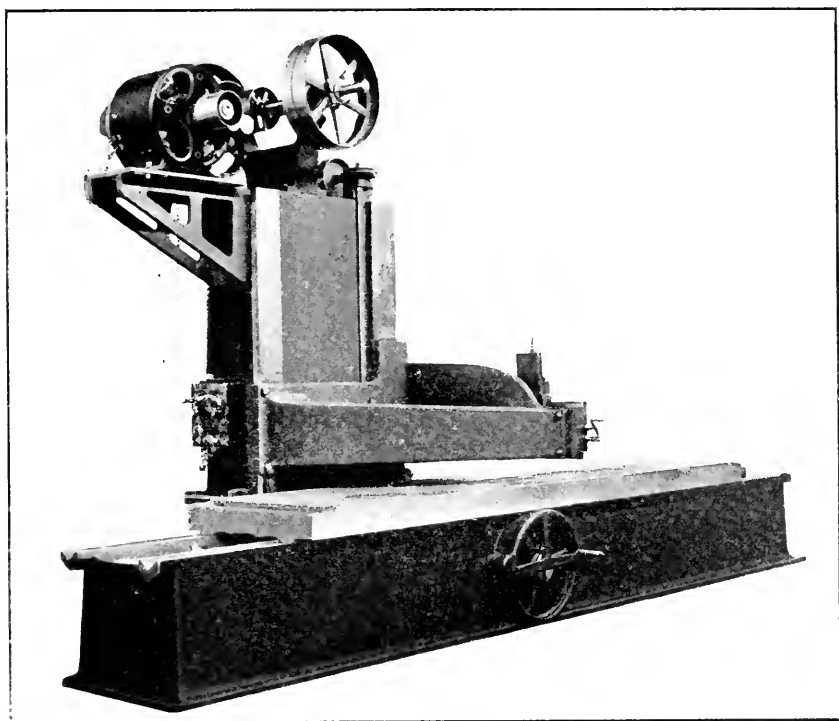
ARMATURE-SHIFTING MOTOR APPLIED TO A PLANER
